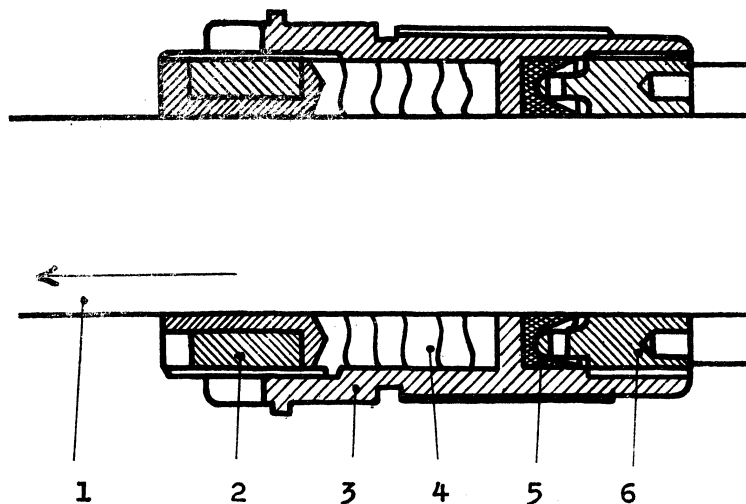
RECOIL BRAKE REAR STUFFING BOX ASSEMBLY
